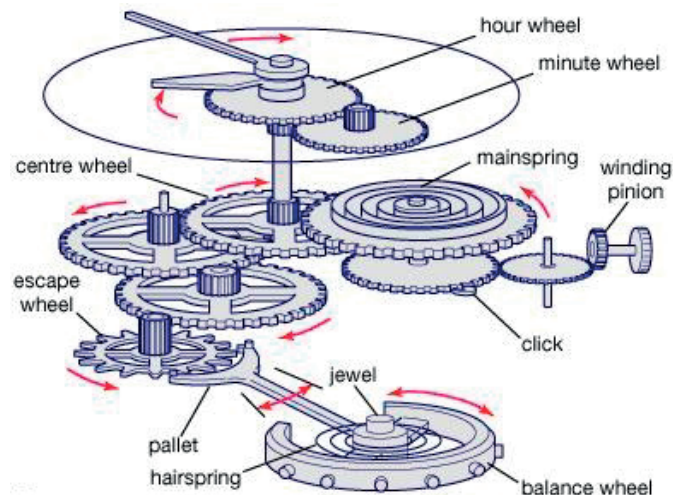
Exploded components of a mechanical watch [enc06].
